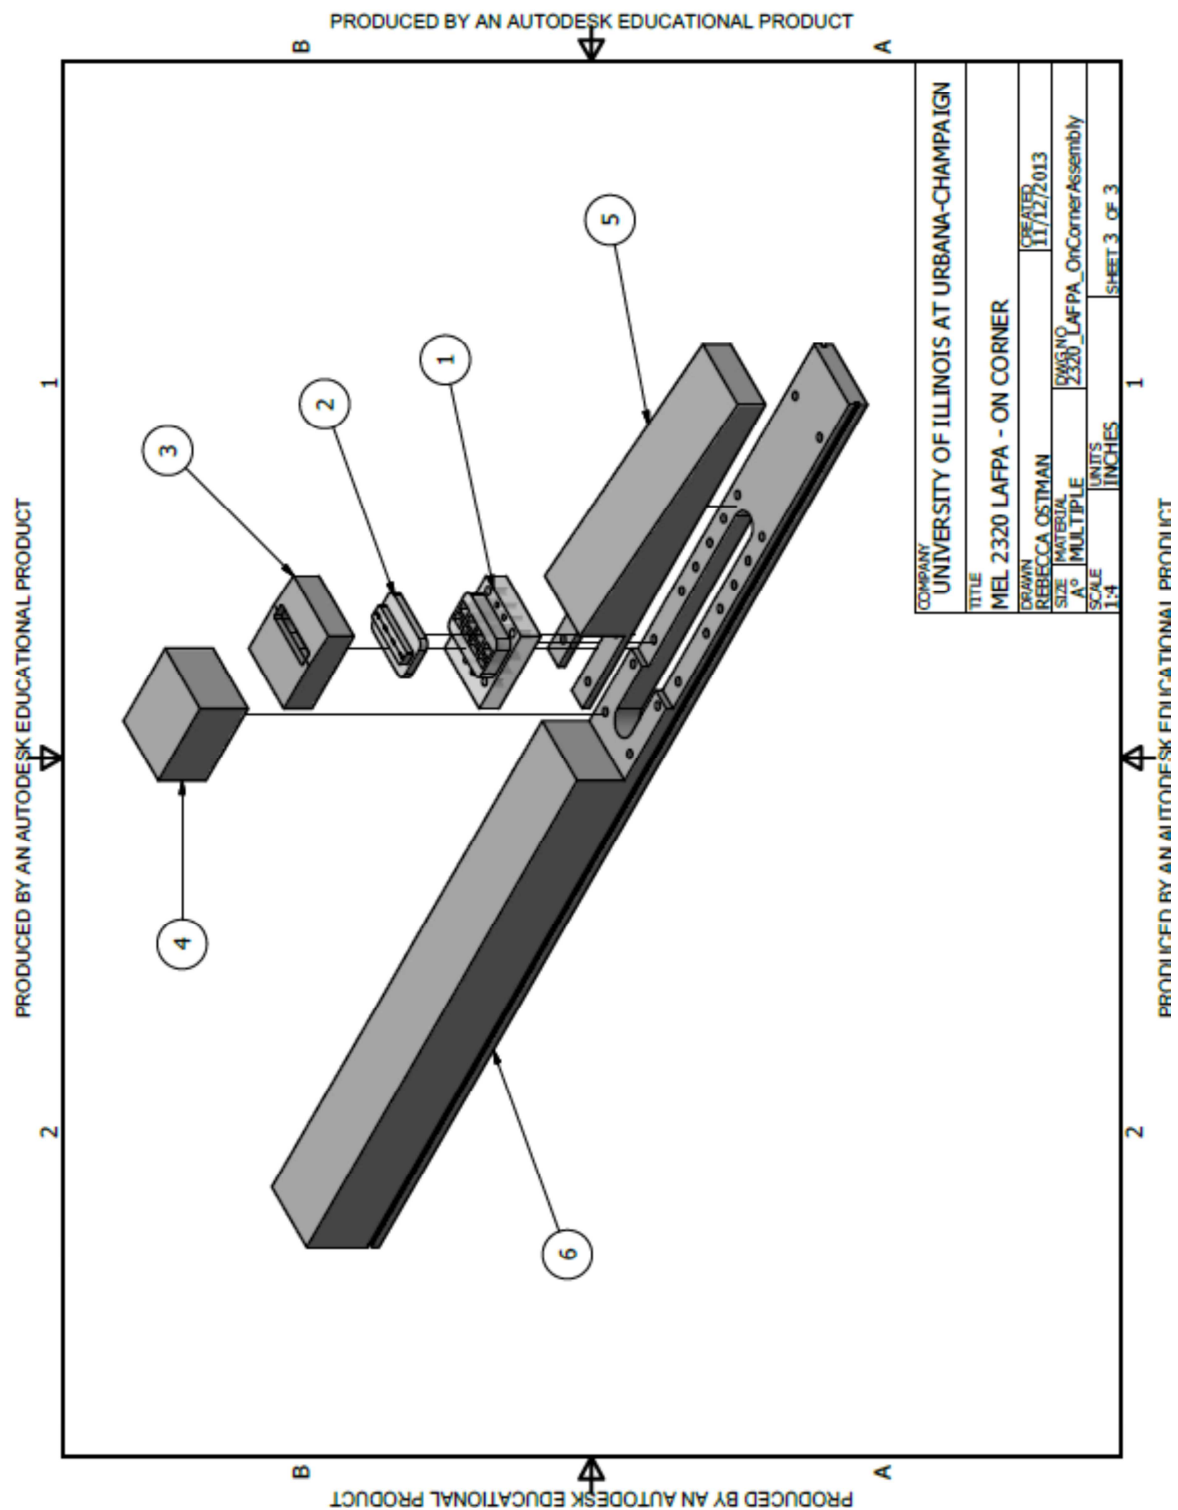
(cont.) c) exploded view of the LAFPA's on the ramp corner assembly.
